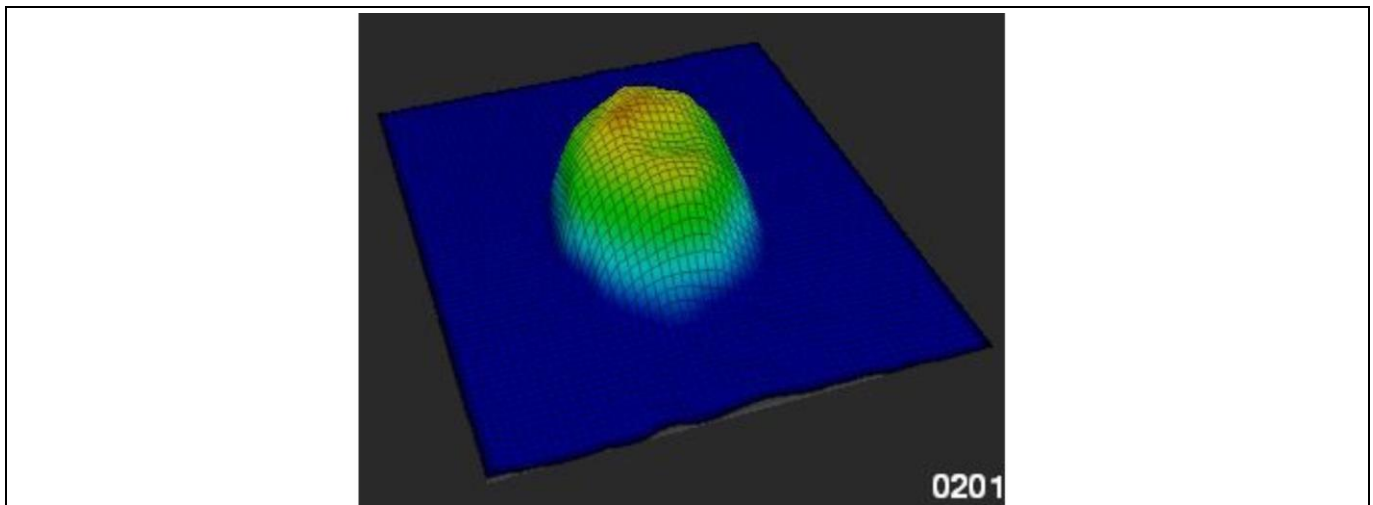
Typical SPI measurement of a solder paste depot for a TSSLP component size 0201.
